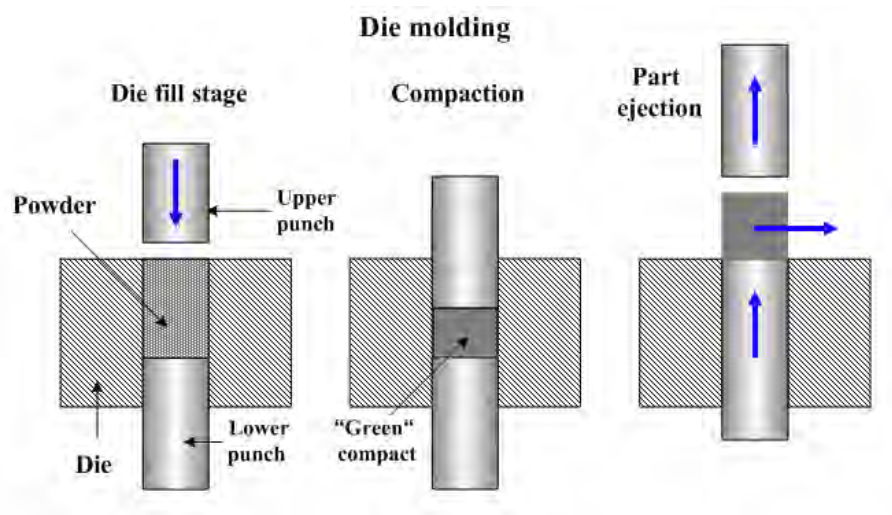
Schematic diagram of uniaxial pressing technique [8].
